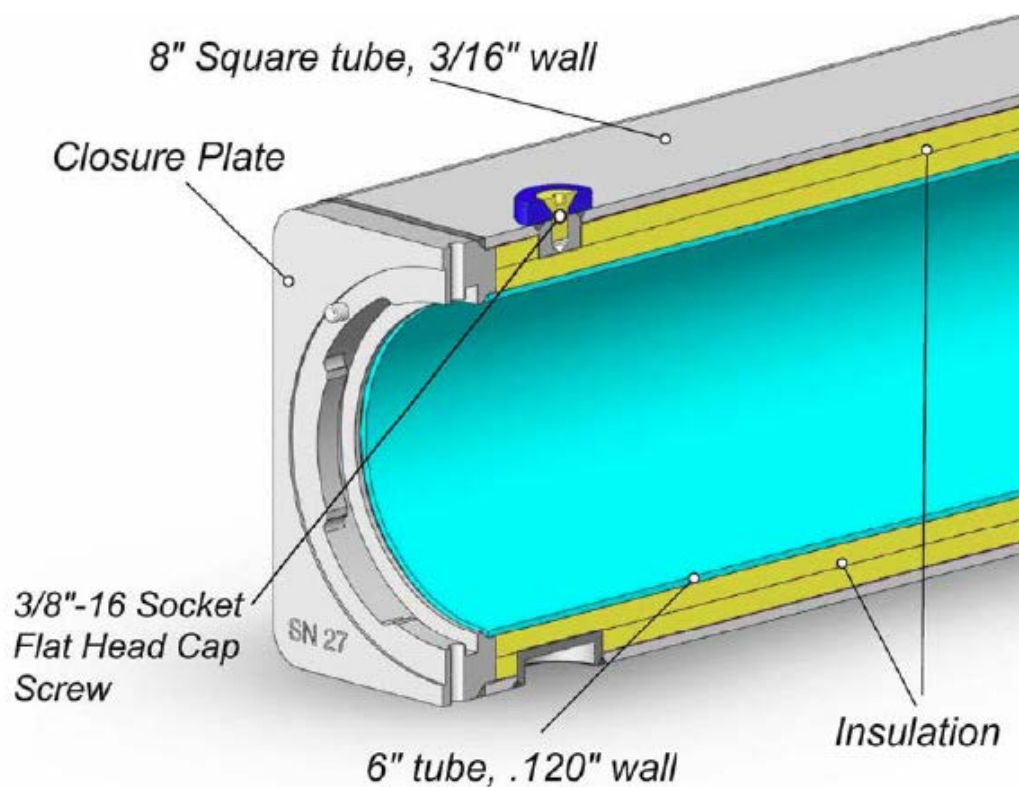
Top End of Single Element ATR Fresh Fuel Shipping Container
